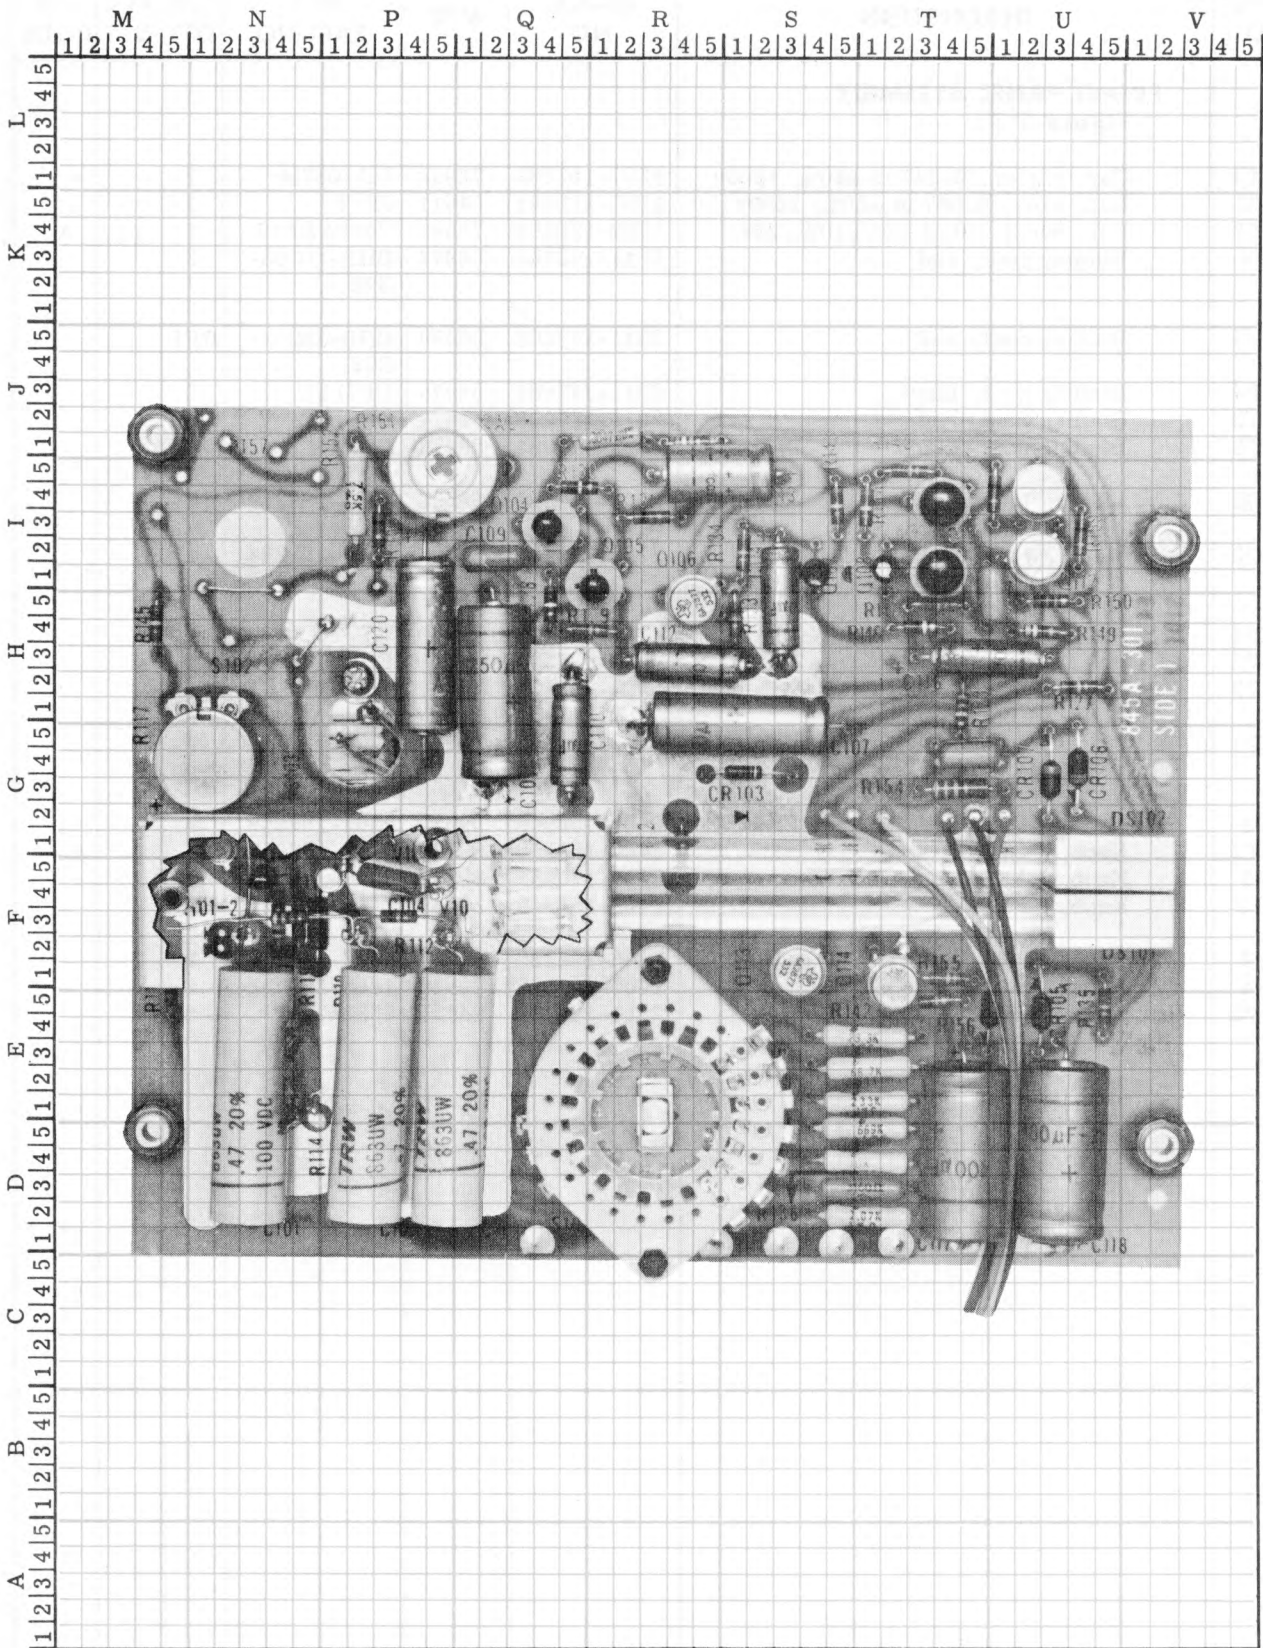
AMPLIFIER P/C ASSEMBLY (SHEET 1 OF 2)
